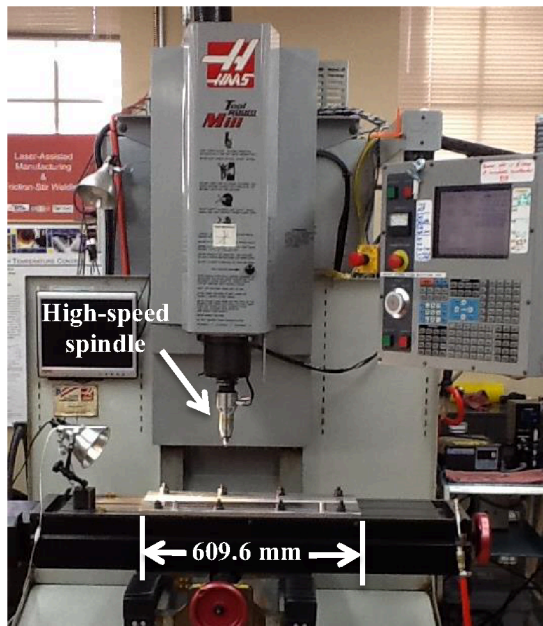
Image of experimental apparatus used for micro end mill tool life testing: workpiece is 609.6-mm-long and bolted directly to the mill table
